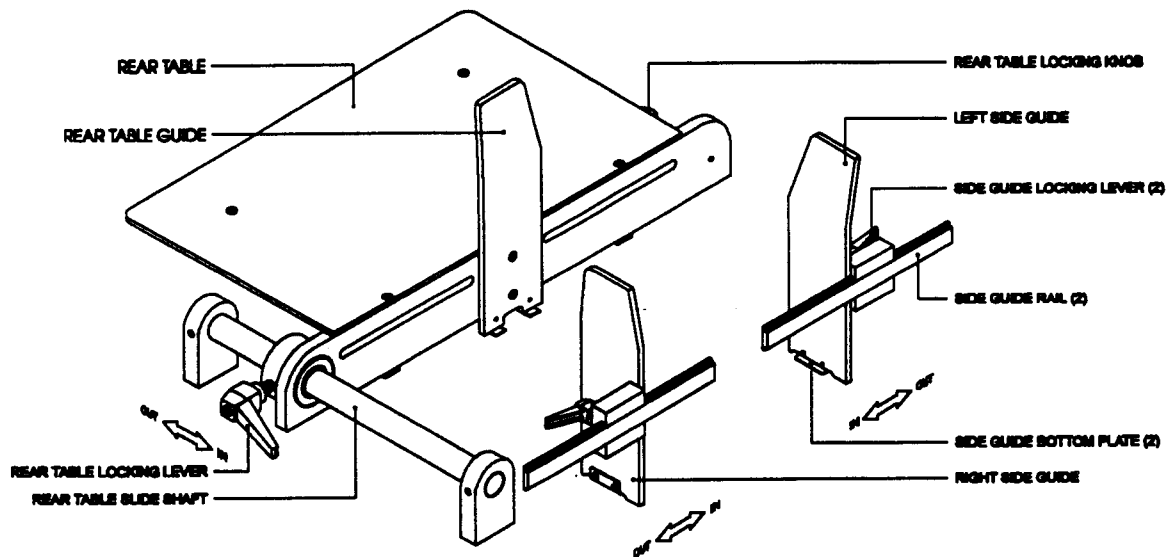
Rear table and side guide illustration indicating the various adjustment points when setting up the hopper material guides.
